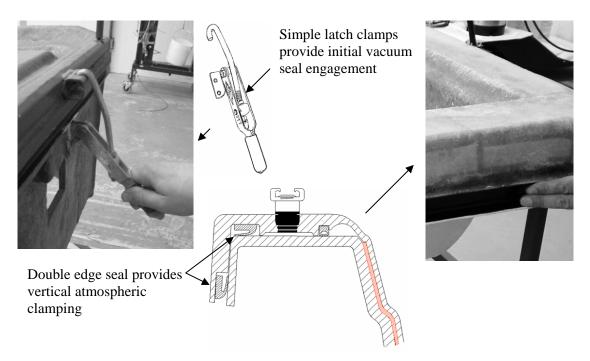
Toggle clamping or vertical flange design to aid mould initial closing.
